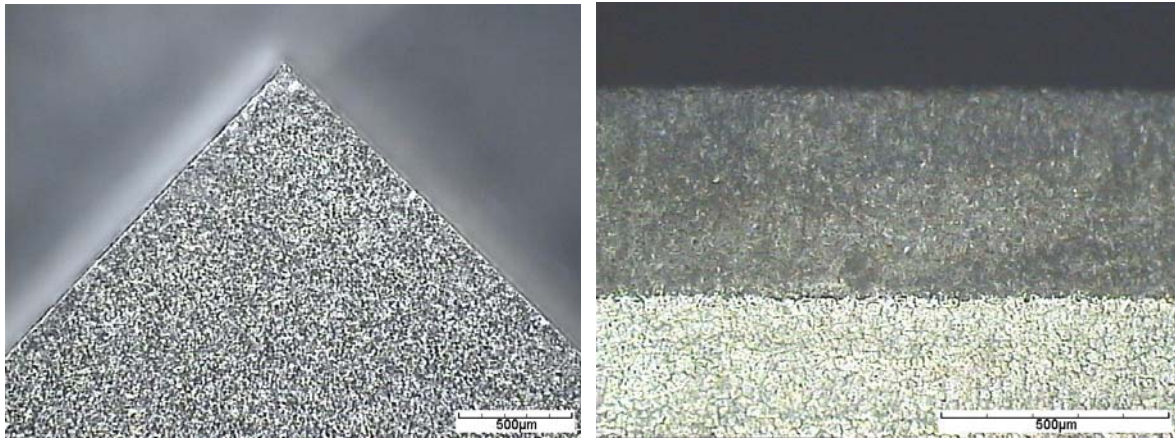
Sample completely cut with the Laser Microjet: PCD on front side, corner of the triangle (left) and side cut showing PCD on top and WC below (right)
